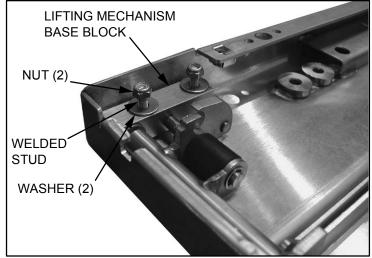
LIFTING MECHANISM REMOVAL
